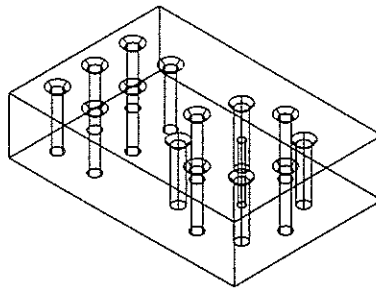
Rectangular and polar array features placed on a rectangular solid
